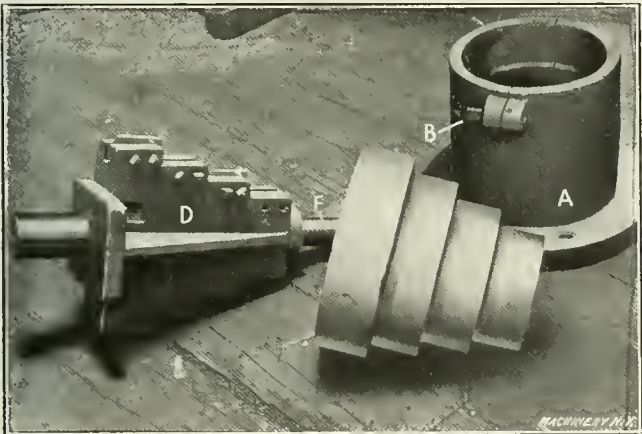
Chuck and Boring-tool used for Machining the Inside of Cone Pulleys
